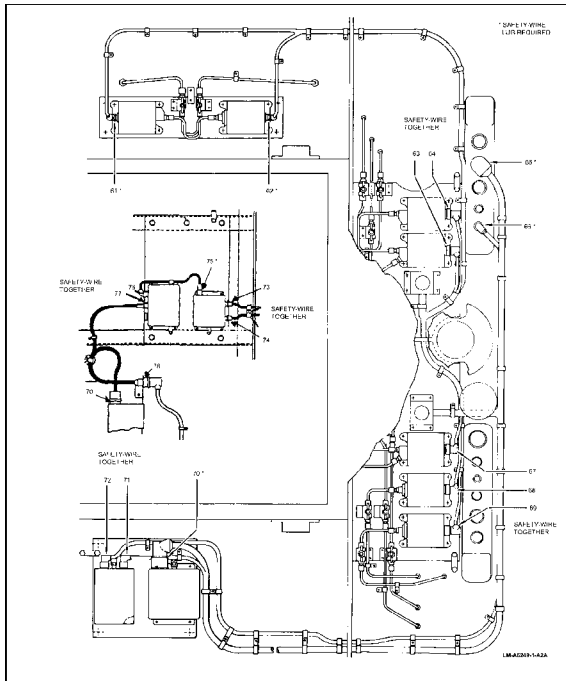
Safety-Wire Locations (Base Enclosure Assembly - Cont.)
